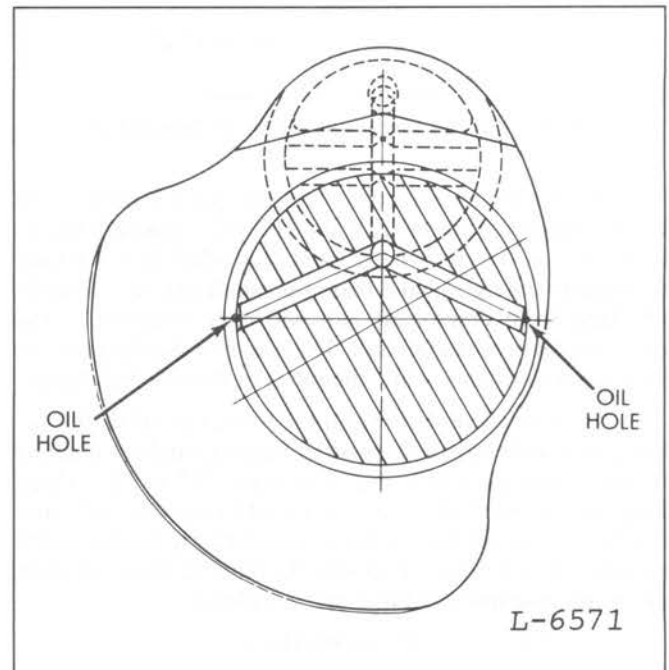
Cross-Sectional View of Crankshaft Showing Offset, Relocated Main Bearing Journal Oil Holes
